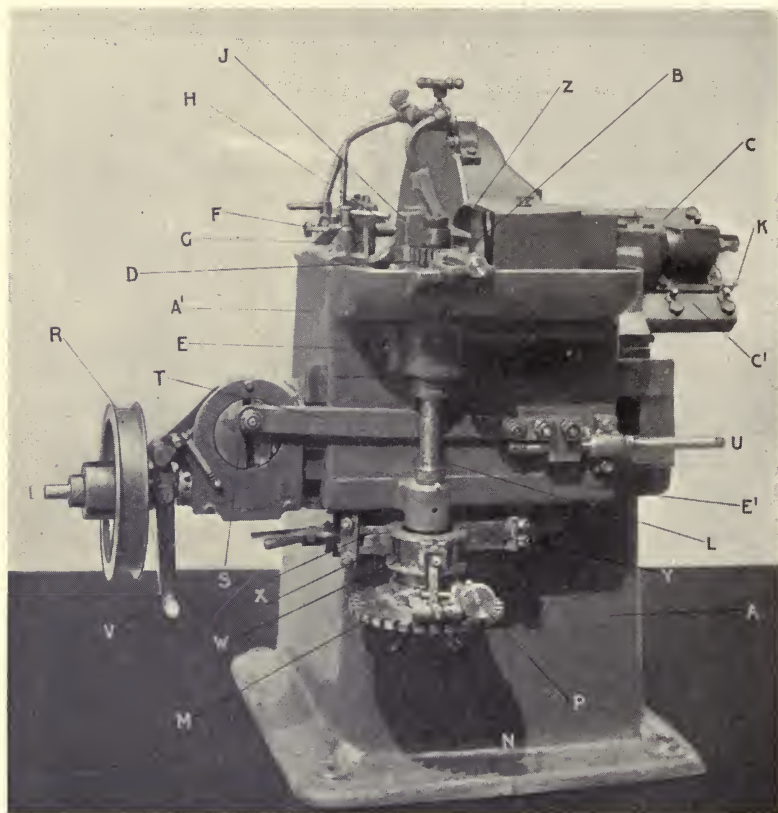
DAIMLER GEAR GRINDING MACHINE. GENERATING PRINCIPLE
